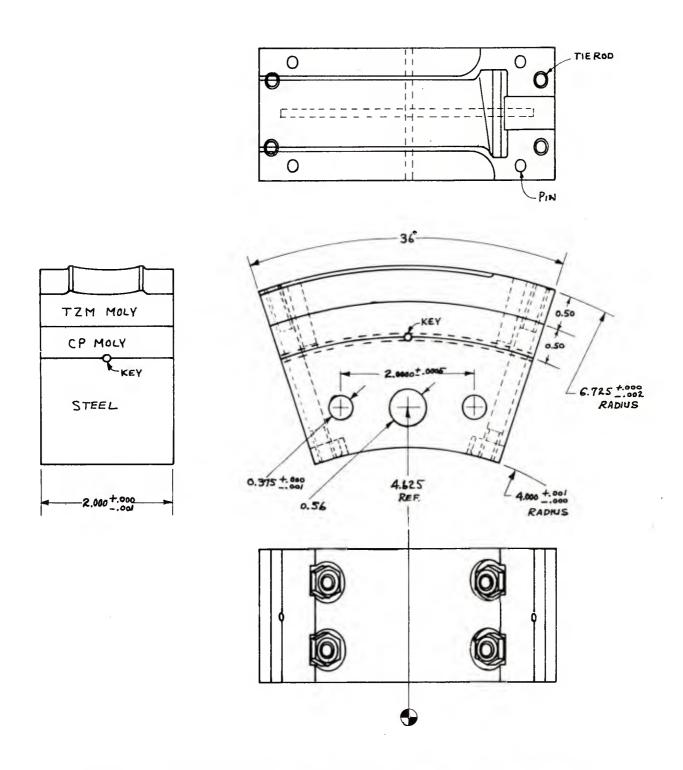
Improved Die Design Used for Phase I Blade Manufacture
